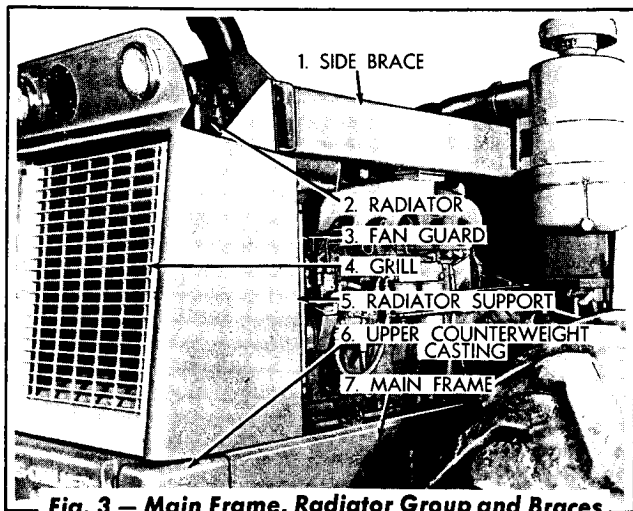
Main Frame, Radiator Group and Braces with Hood and Side Panels Removed
